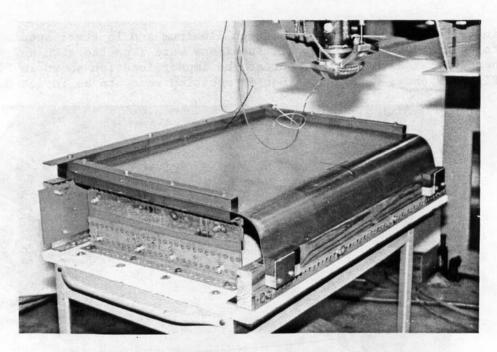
FULL-COVER HOOD PROTOTYPE TEST SPECIMEN
